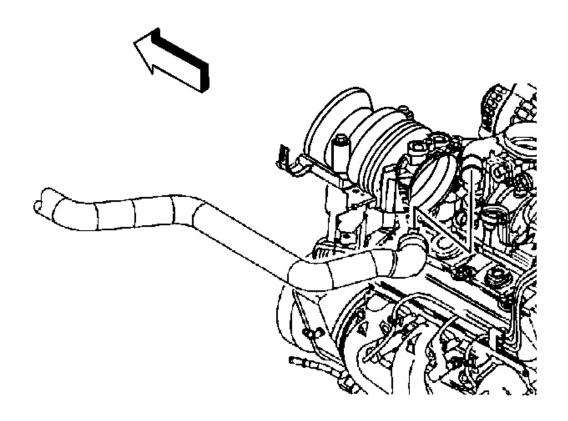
View Of Radiator Inlet Hose, Clamps & Thermostat Housing Courtesy of GENERAL MOTORS CORP.
